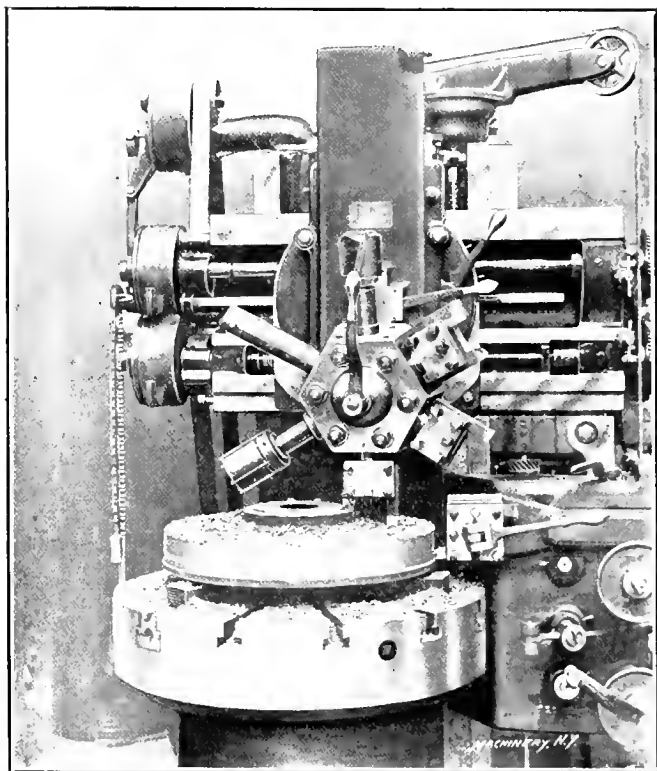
Machine in Operation, Finishing Gear Blanks.
